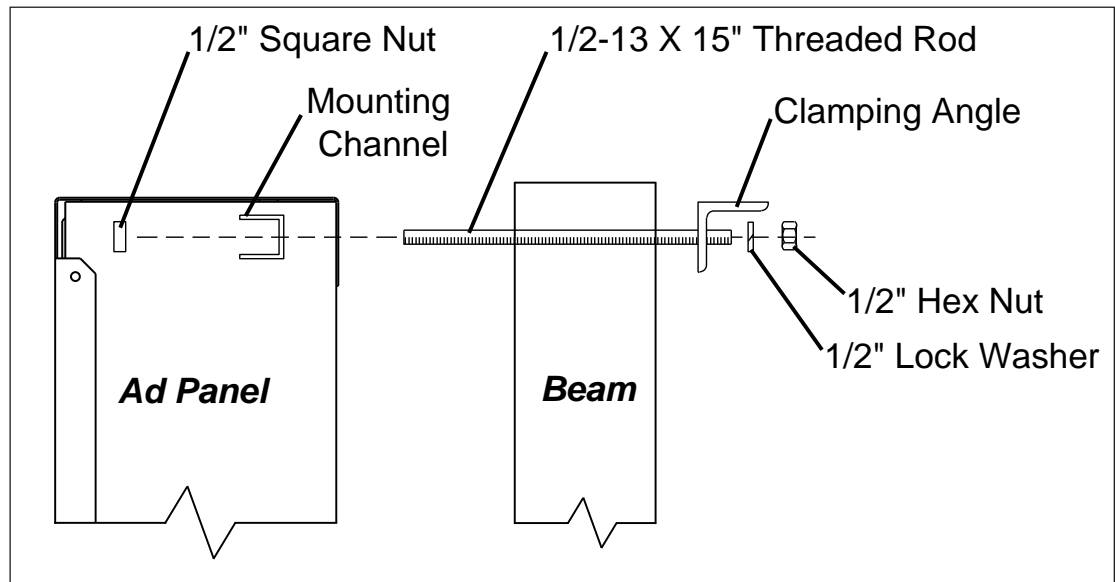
Ad Panel Clamping Angle Mounting, Side View
